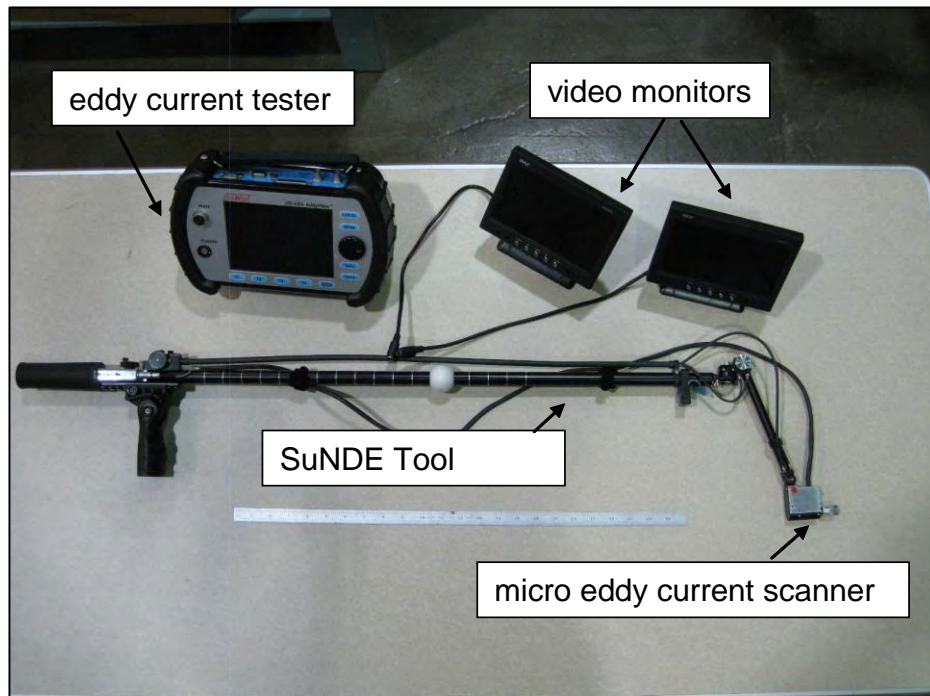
SuNDE Tool equipment for limited access HFEC inspection for cracks around fasteners.
